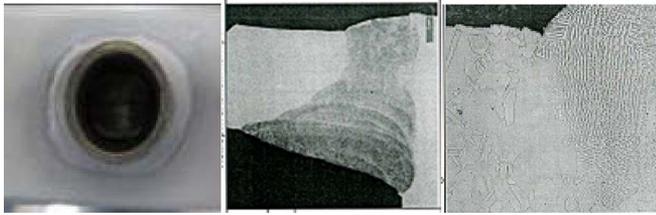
(Left) Penetration test and (center) macro and (right) micro test of the He inlet weld.
